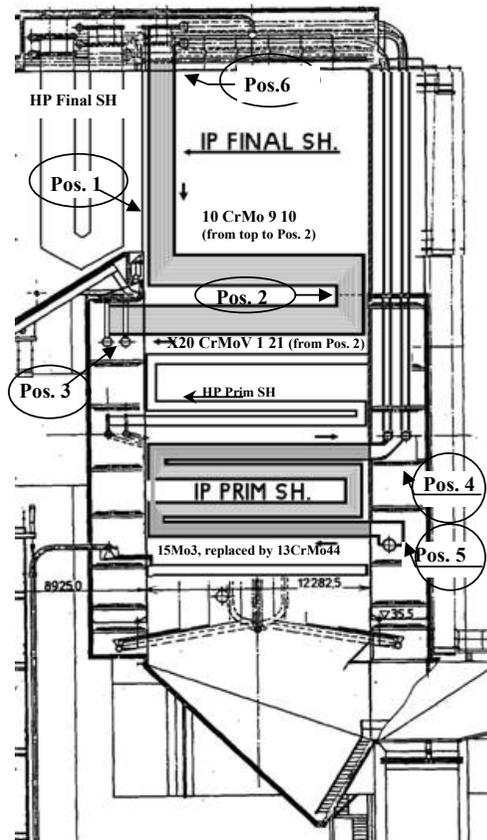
ASV5. Enlarged sectional view of the second pass.
